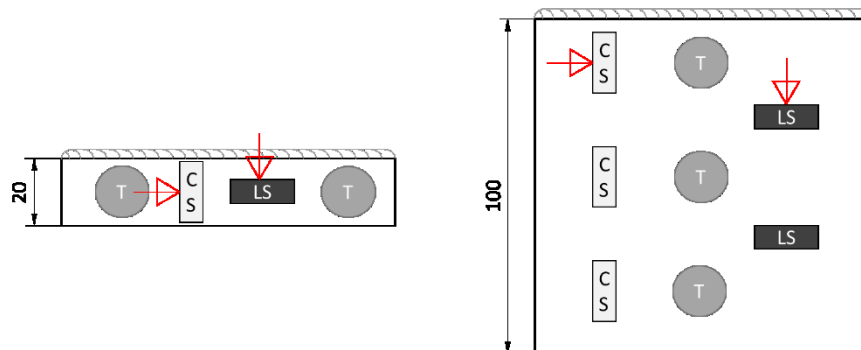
Position and amount of micro sections and tensile specimen; T- tensile specimen, CS-cross section, LS- longitudinal section
